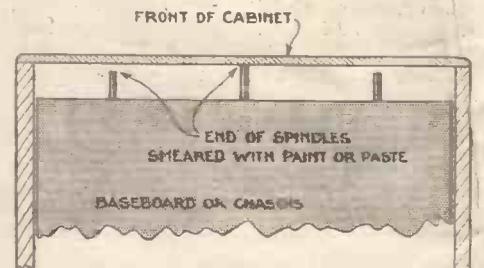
Remember this tip—it will help you when drilling the holes in a cabinet to take the spindles of the variable controls
